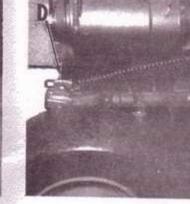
To install spring assist lift assembly, remove hair pin at (A) and
